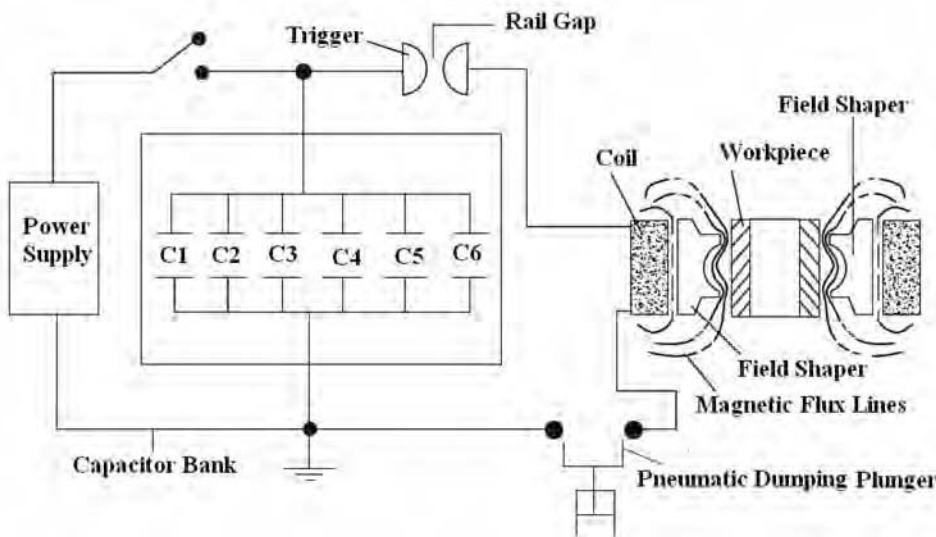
Schematic of magnetic pulse welding equipment
